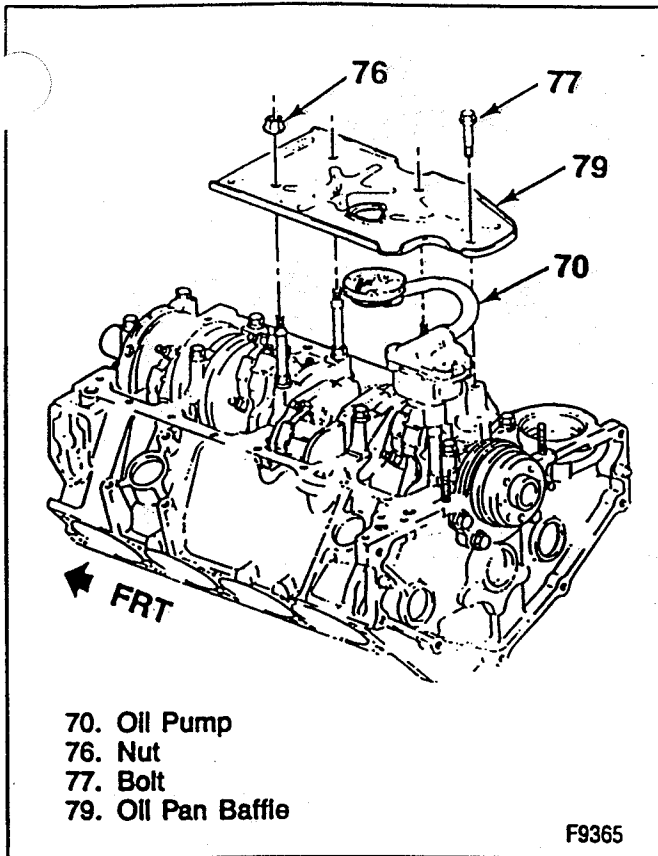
Oil Pan Deflector (5.0L and 5.7L Engines)
